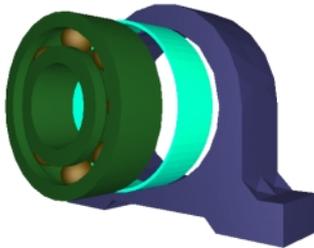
Viscoelastic layer mounted between the bearing and the housing
